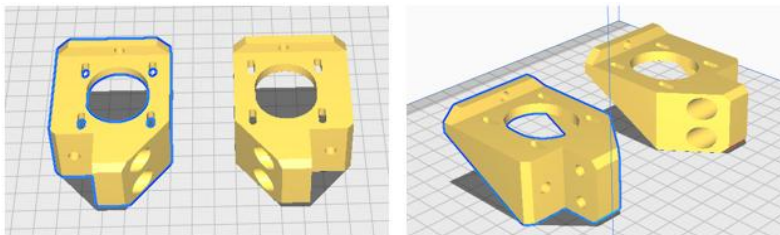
View of how “XY Motor Mount” STL files should be mirrored in the slicer.
